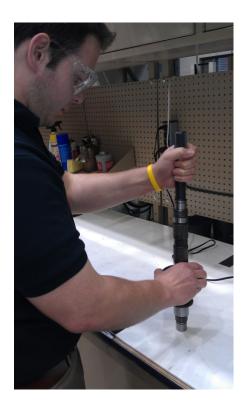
Team member Zach Wilkoski analyzing the synchronizer hub and main shaft assembly
